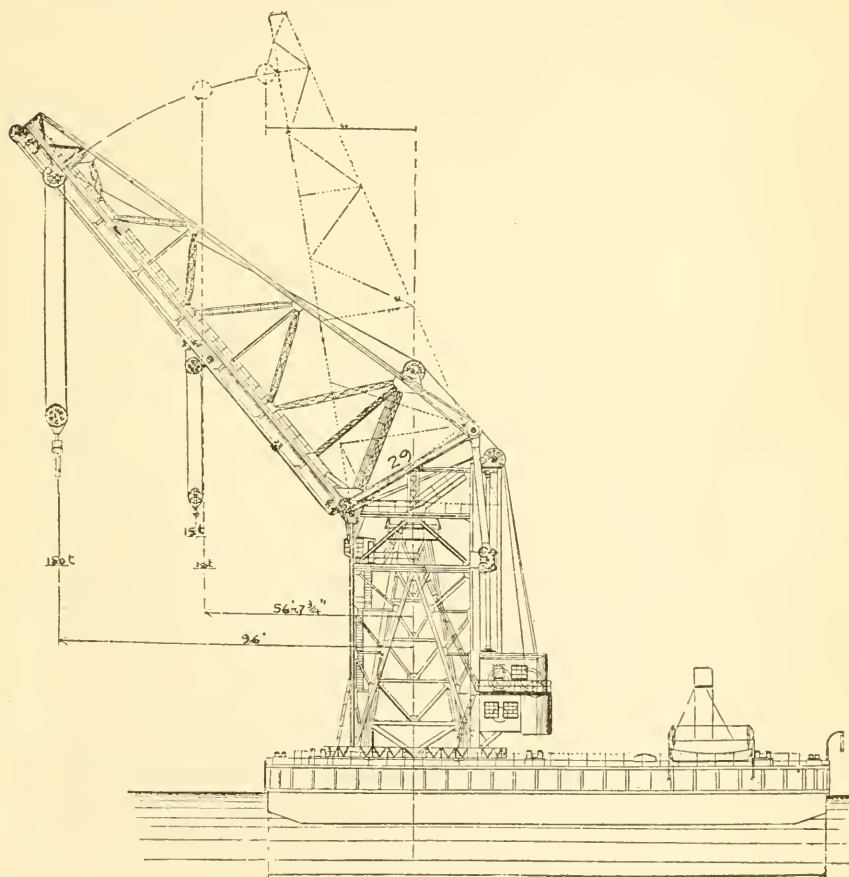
SIDE ELEVATION OF FLOATING CRANE "AJAX."
